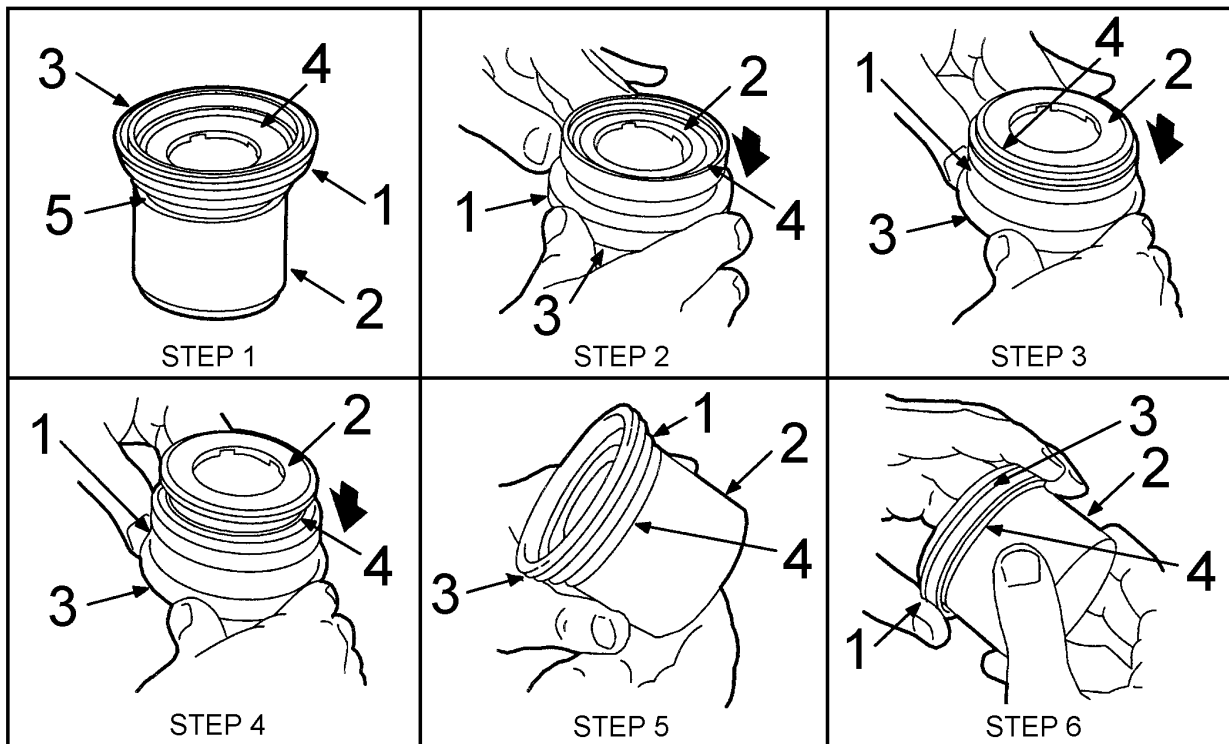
Install Caliper Piston Boot into Caliper Piston Boot Groove
